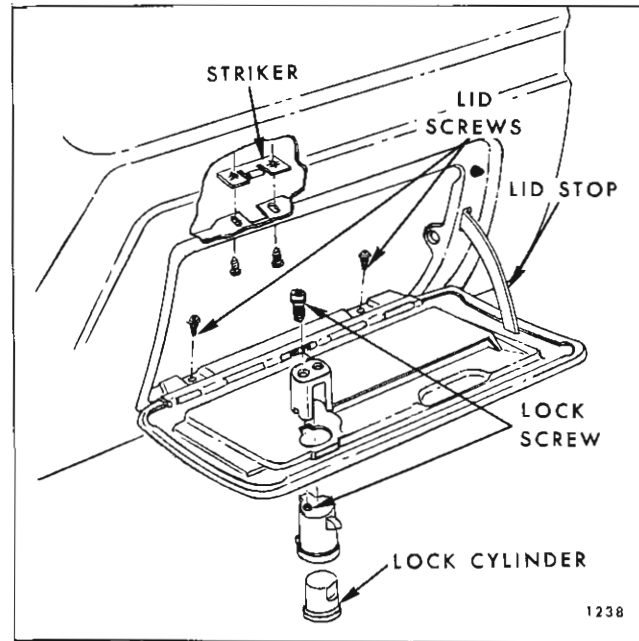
C16—Instrument Panel Compartment Door Assembly - 23000 Series
